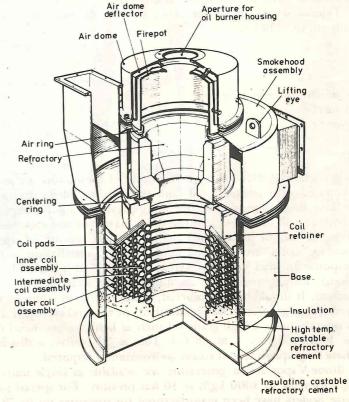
Cut-away view of Model 7217 Stone-Vapor steam generator showing coil assembly
